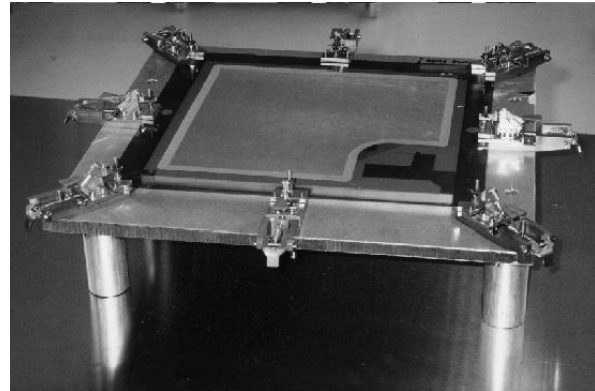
Picture of the HERA-B GEM stretching device. Eight clamps keep the GEM and stretch it with springs.
